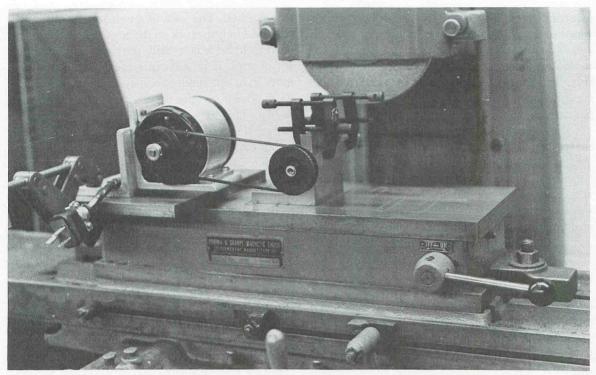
Device for turning taper on a shaft with surface grinder.
